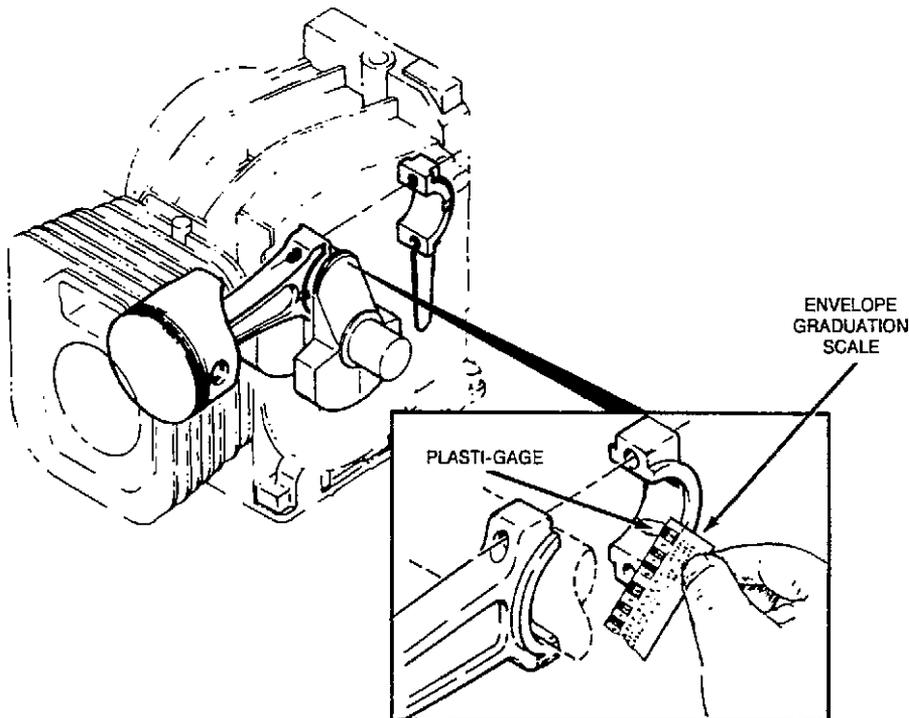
MEASURING CRANKPIN CLEARANCE
